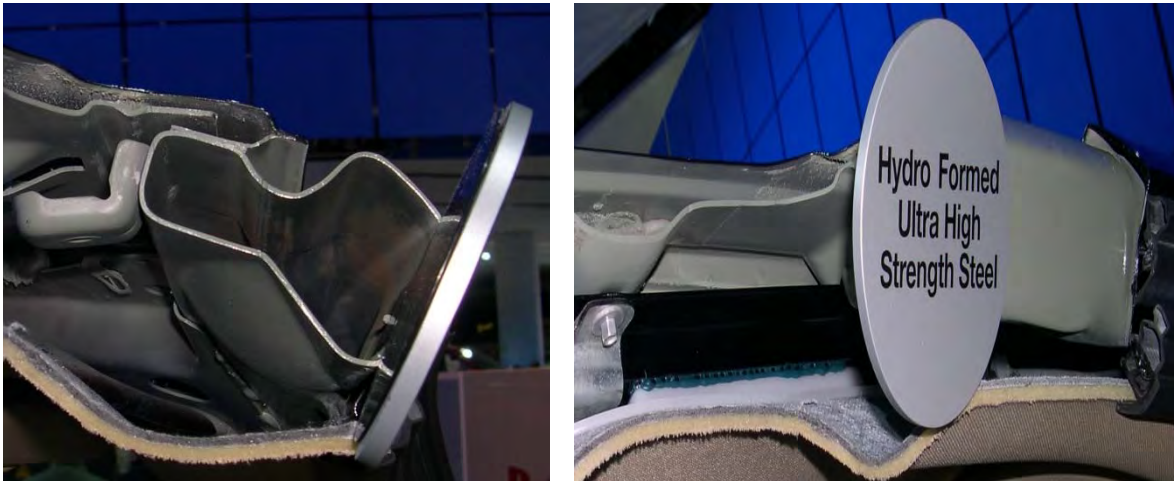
E-15: North American 2008 truck roof rail using AHSS hydroformed section.^{P-1}
